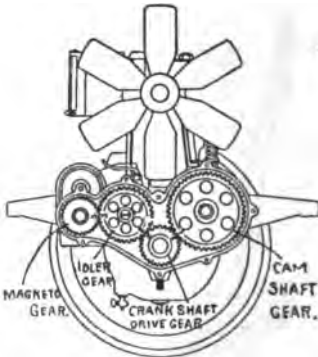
Method of driving the one cam shaft, and idler gear to drive magneto drive gear on an "L" head cylinder engine.
